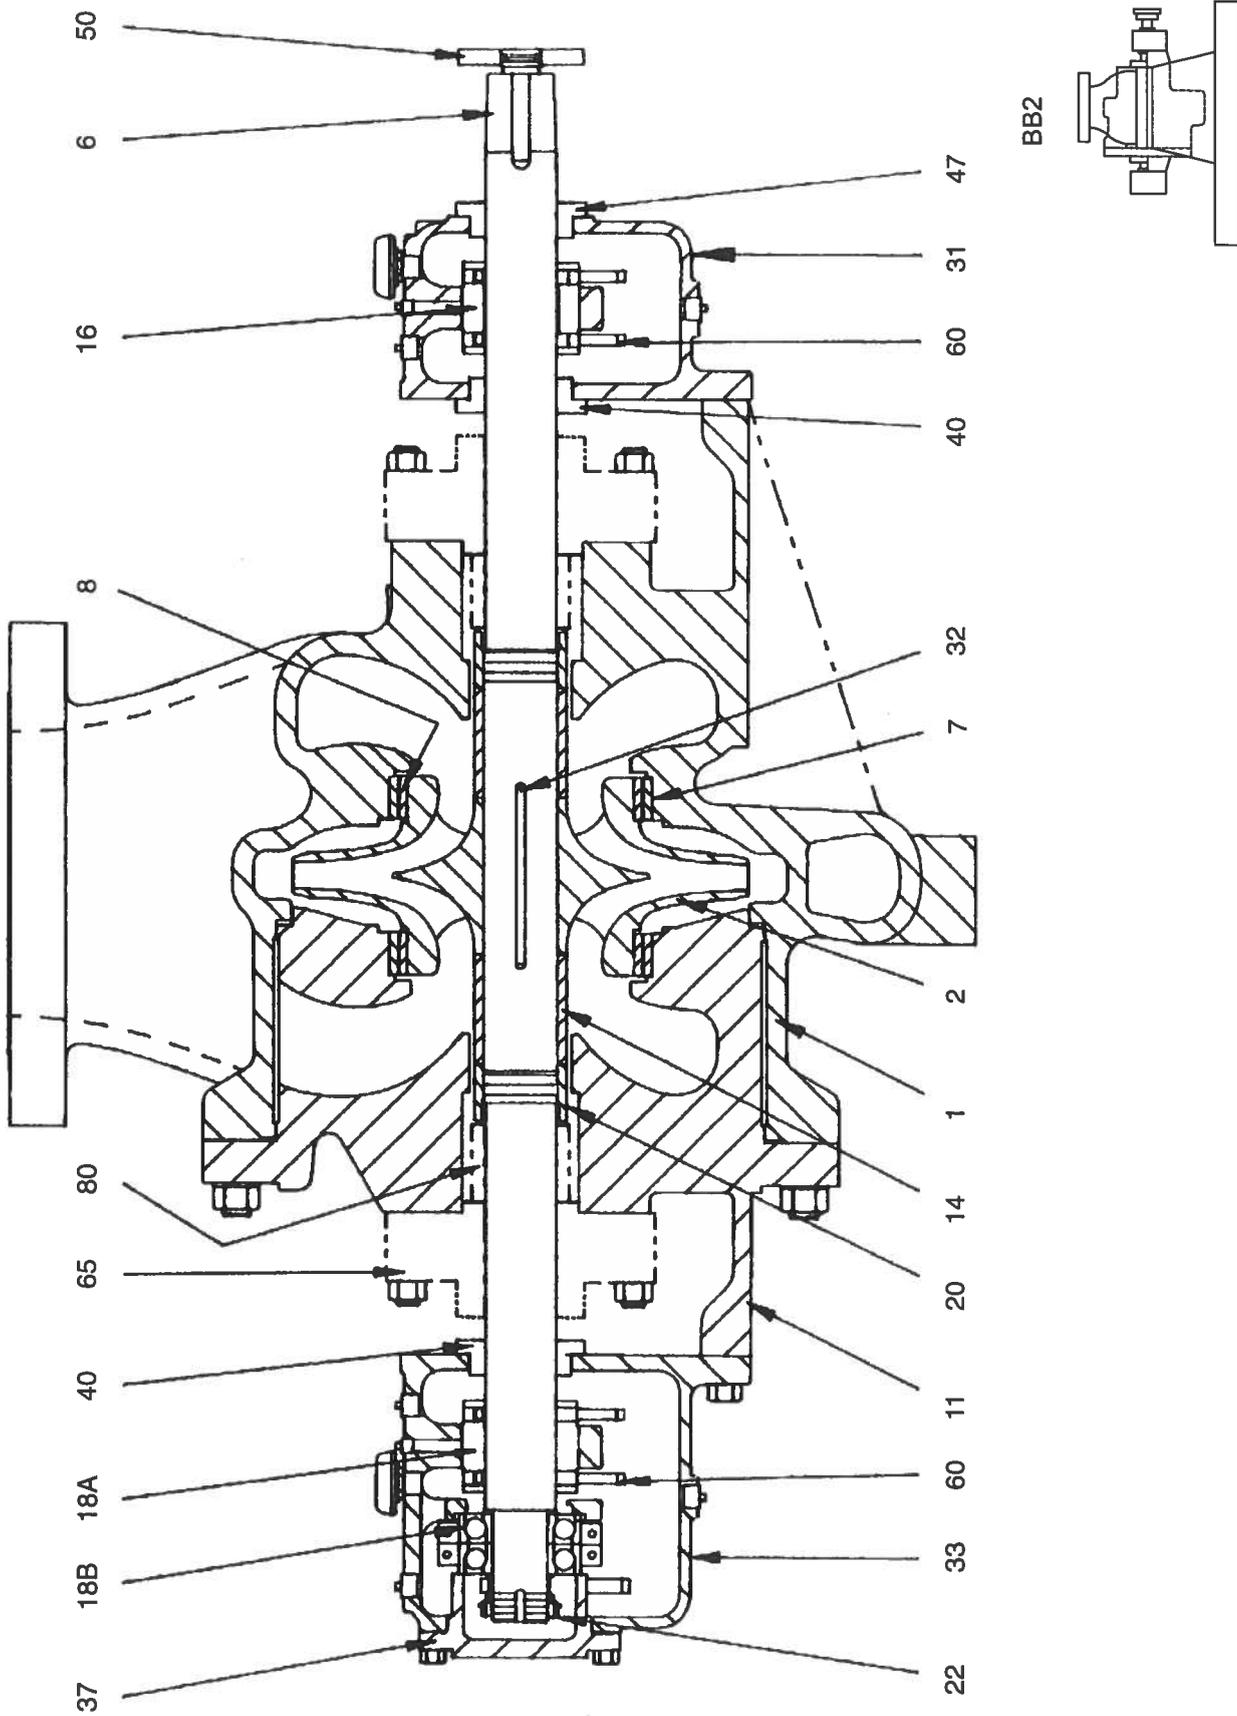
Impeller between bearings — flexibly coupled — single stage — radial split case
